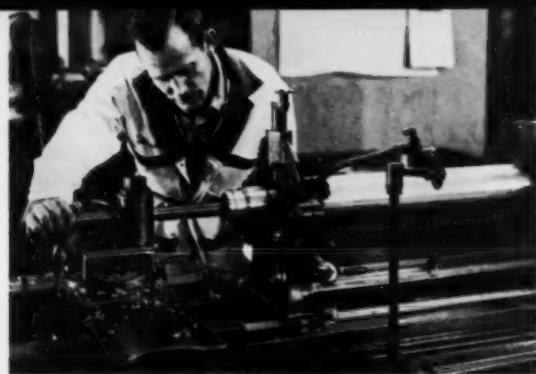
Bars are machined to a close tolerance. A tolerance of .0004 in. must be maintained.
